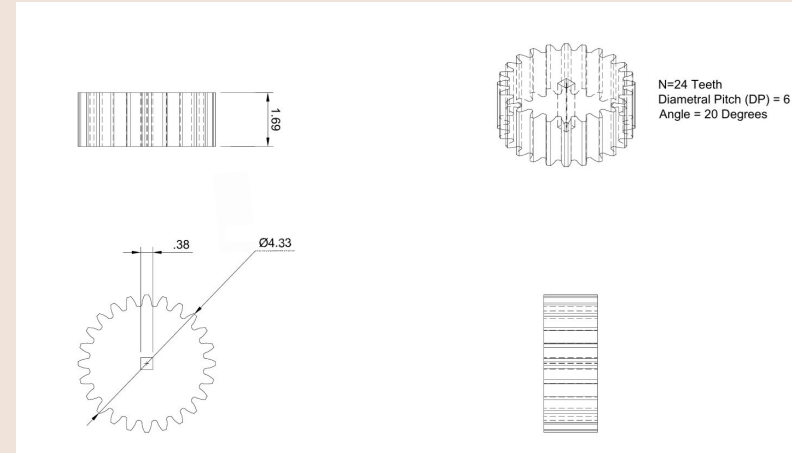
Orthographic Projection using Fusion360 Spur Gear Utility
